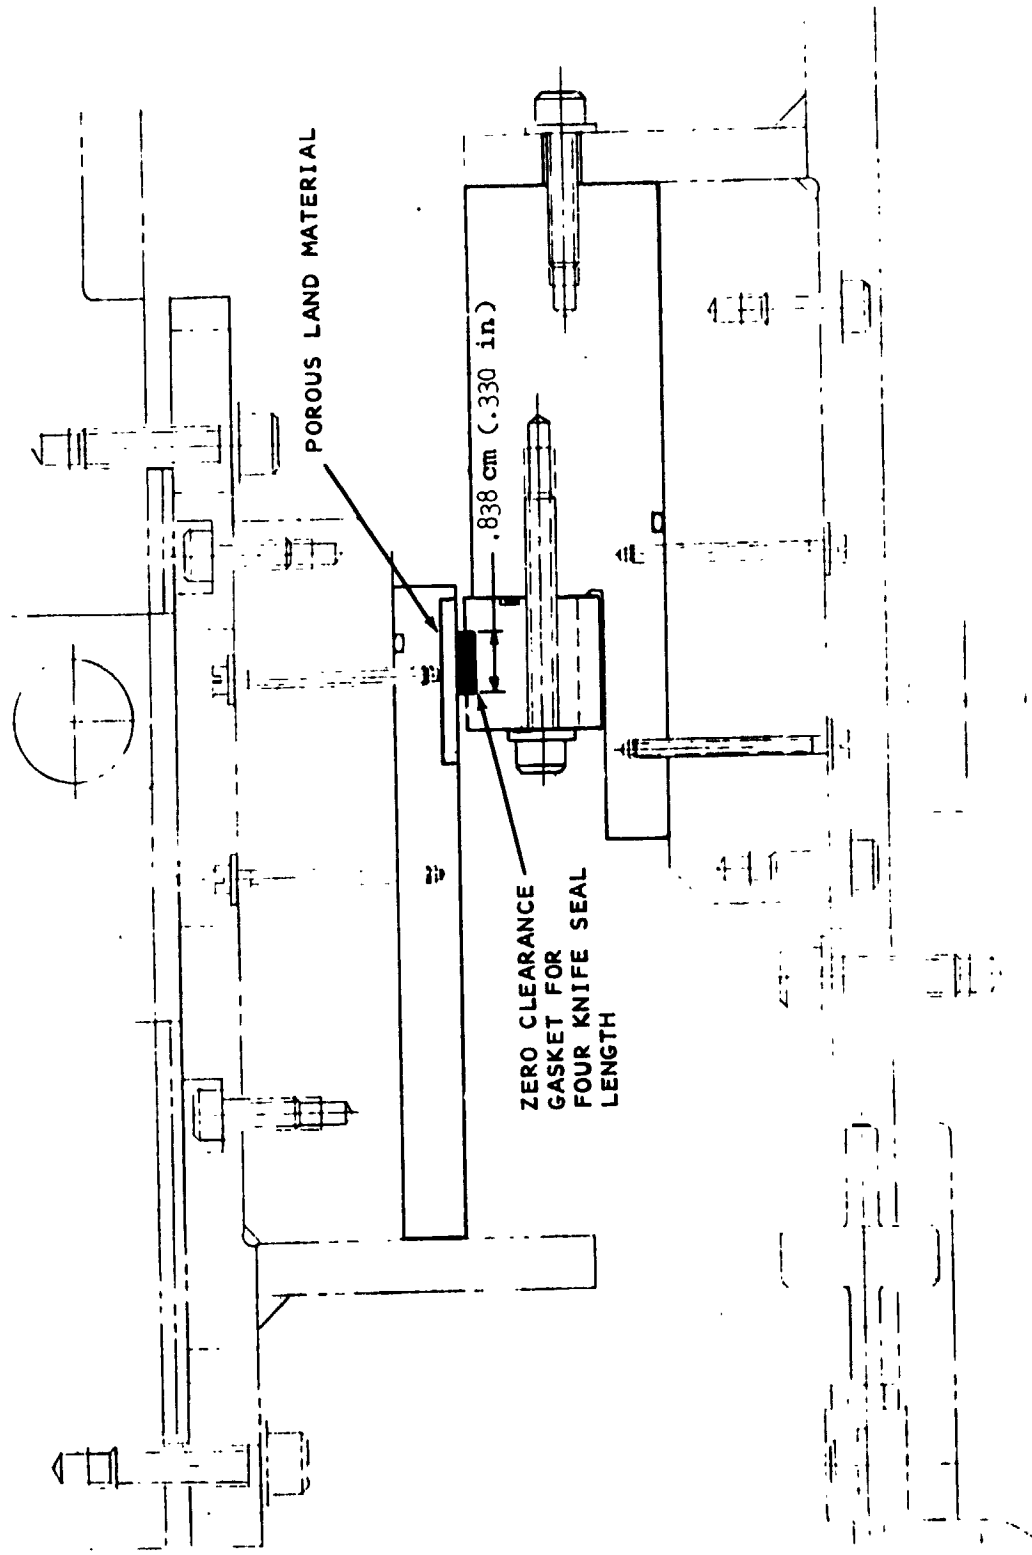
SKETCH OF POROSITY LEAKAGE TEST METHOD FOR FOUR KNIFE STRAIGHT-THROUGH SEAL
